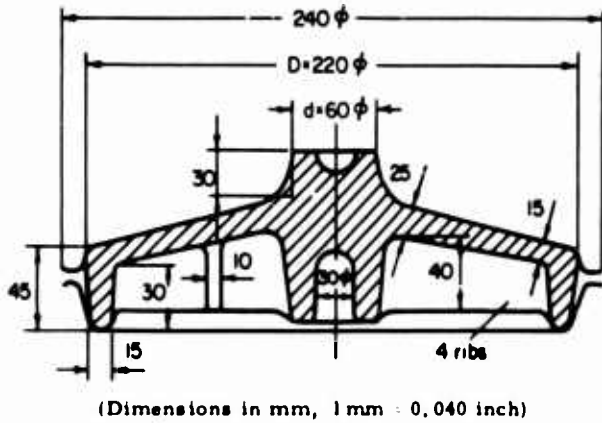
EXAMPLE FOR CALCULATING THE FORGING LOAD⁽²⁾
